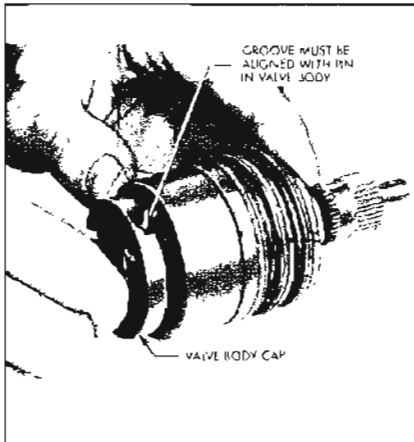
Assembling Stub Shaft, Torsion Bar and Cap Assembly in Valve Body
